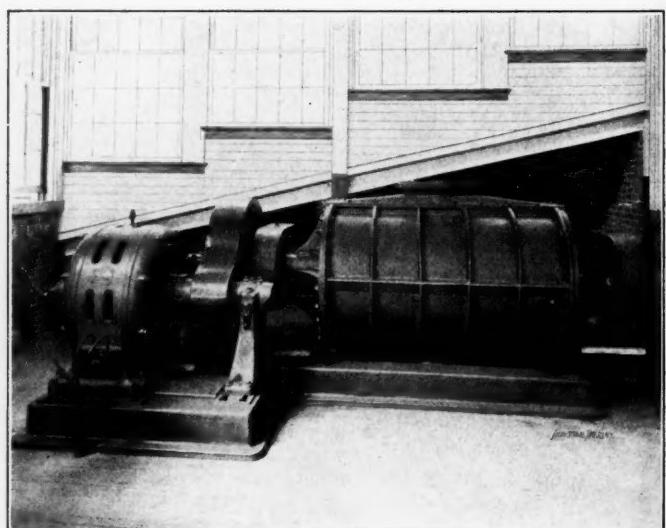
Thirty-H. P. Induction Motor, Geared to No. 6 Roots Blower for Cupola Blast.
